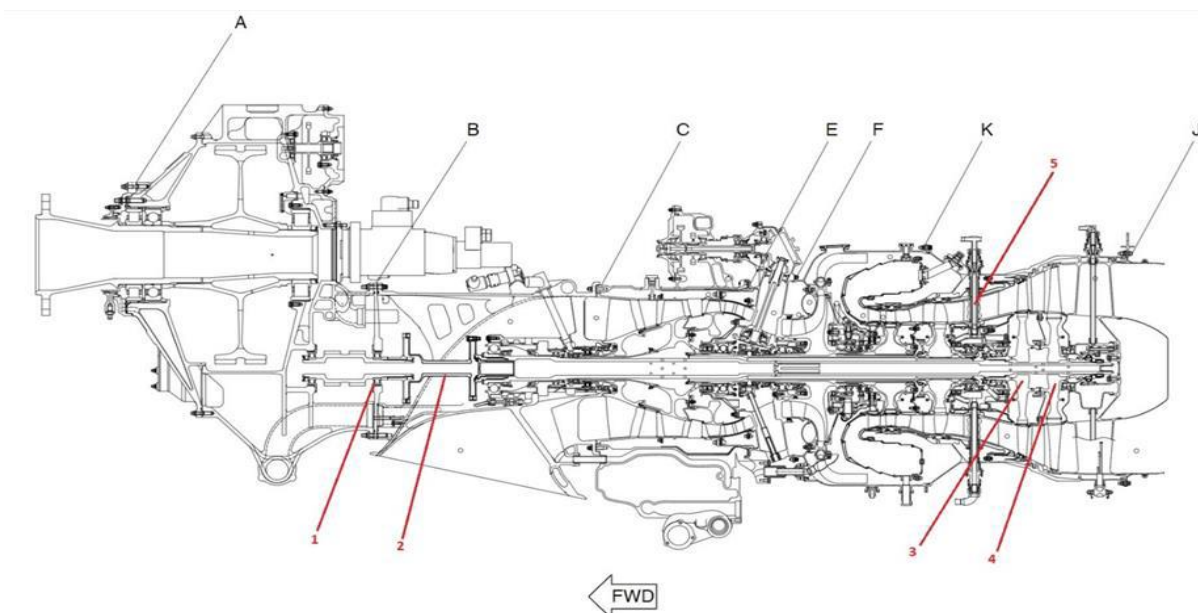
Longitudinal section of PW150A engine with damaged engine parts [source: P&WC].
